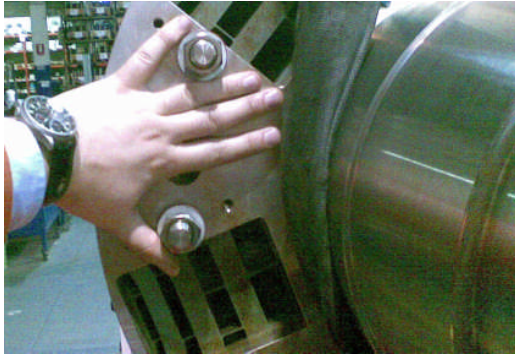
Motor 2: detail of the hollows housing the inset PMs, seen from the inspection windows of one of the flanges of the rotor stack.
